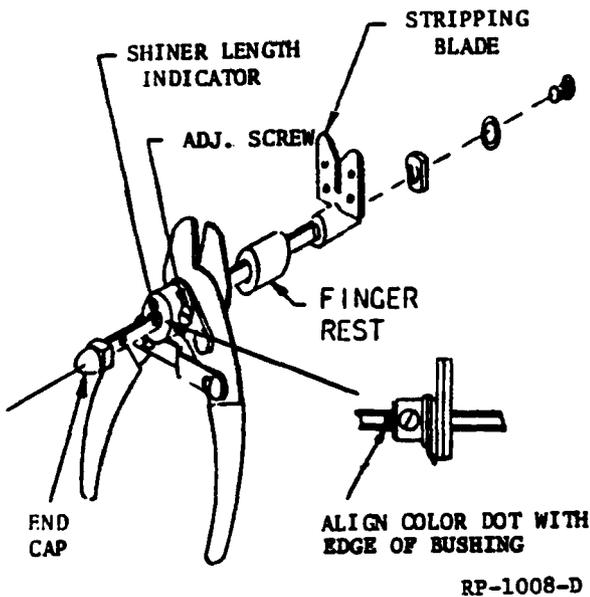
R-4473 TOOL, COMBINATION CUTTING AND SKINNING (PARS. 7.121, 7.123)
